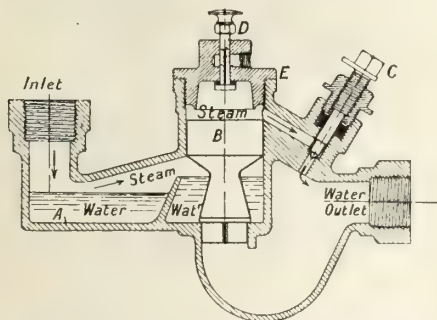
SECTIONAL ELEVATION OF TRAP.
